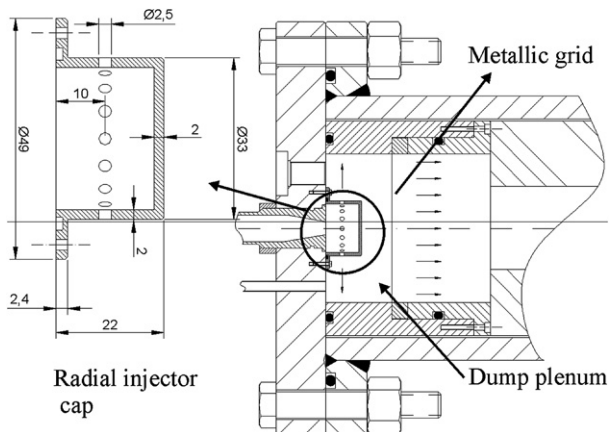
Motor forward-end section: radial injector and dump plenum (dimensions are in mm).
